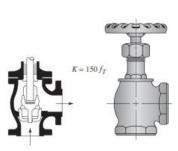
Angle valve, (Reprinted with permission from "Flow of Fluids Through Valves, Fittings and Pipe, Technical Paper 410" 2009. Crane Co. All Rights Reserved)
